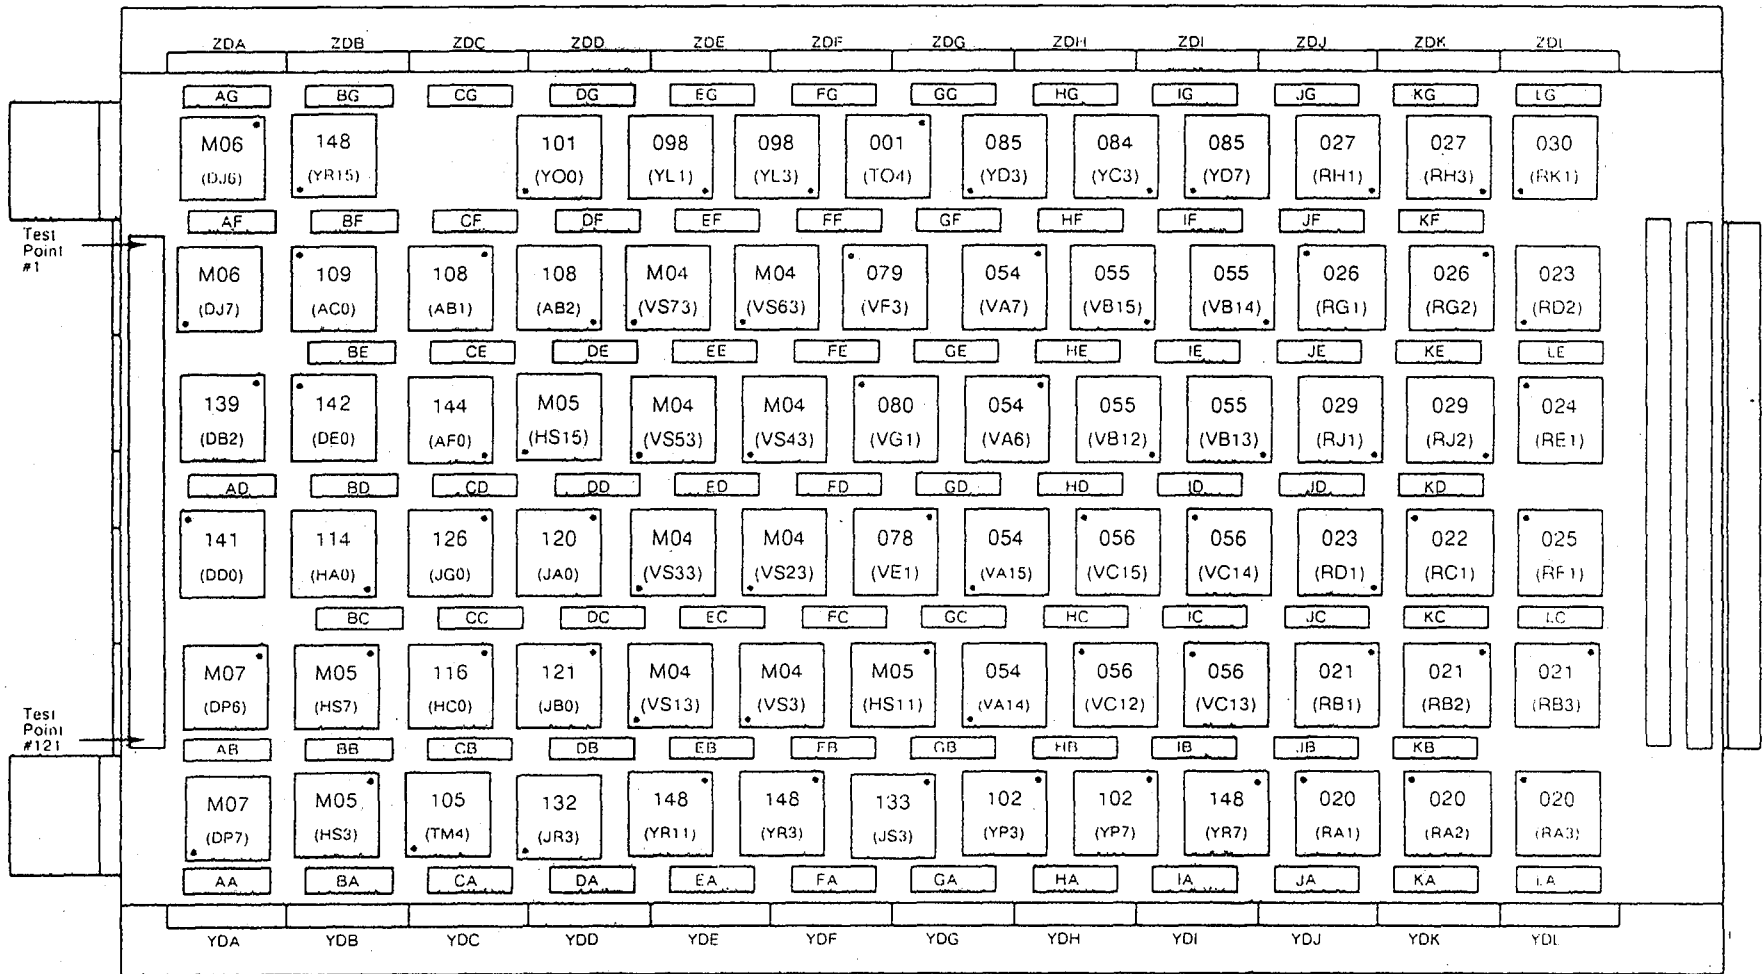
Sample of CPU Module Board C Layout Rev 4 (Sheet 3 of 4)
